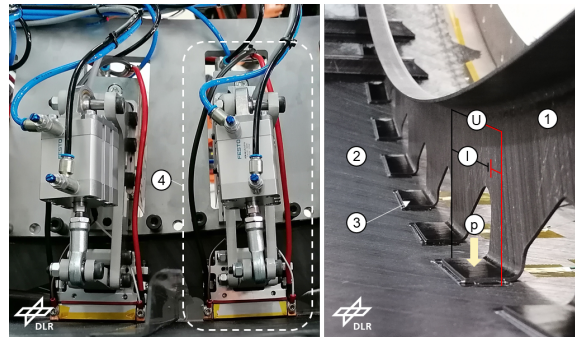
Custom-made weld modules for resistance welding of frames to skin (left). Resistance welded composite frame within the test shell (right).
